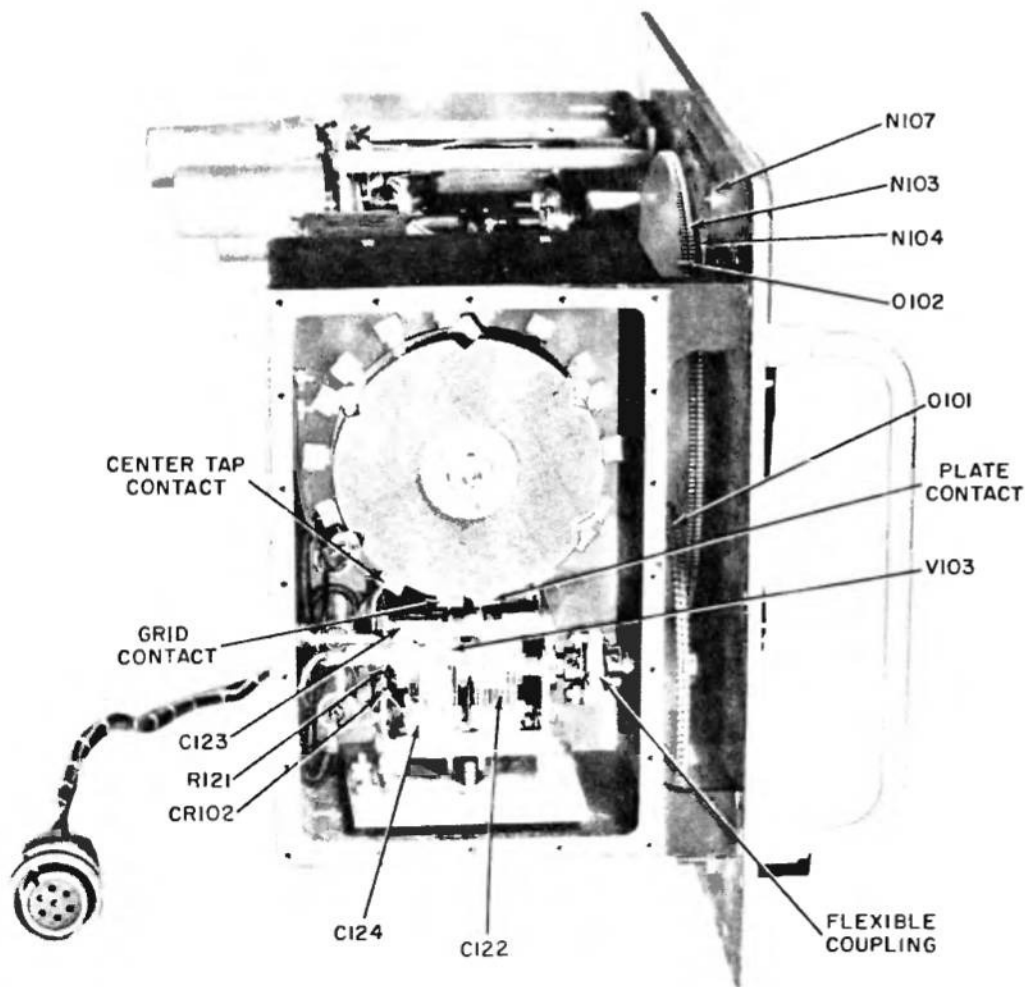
RF Oscillator and Variable Capacitor Subassembly.
